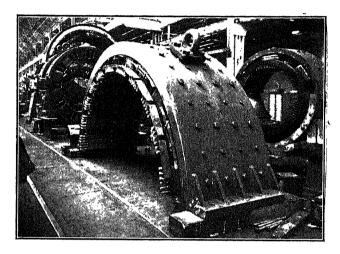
A MAGNET FRAME MADE OF BENT SLABS WITH FLANGES FOR BOLTING HALVES TOGETHER WELDED ON
